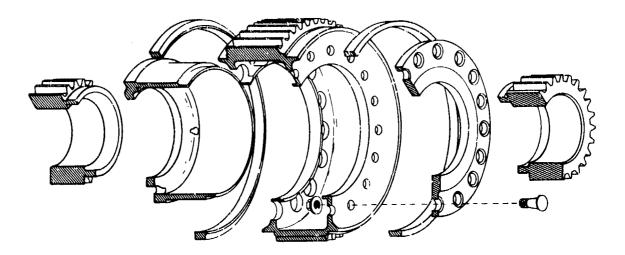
Second-Row Pinion Initial Design, Exploded View.
